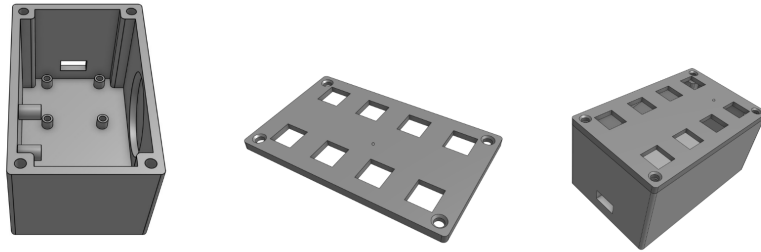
Enclosure container (left), cover (middle), and complete assembly (right).
